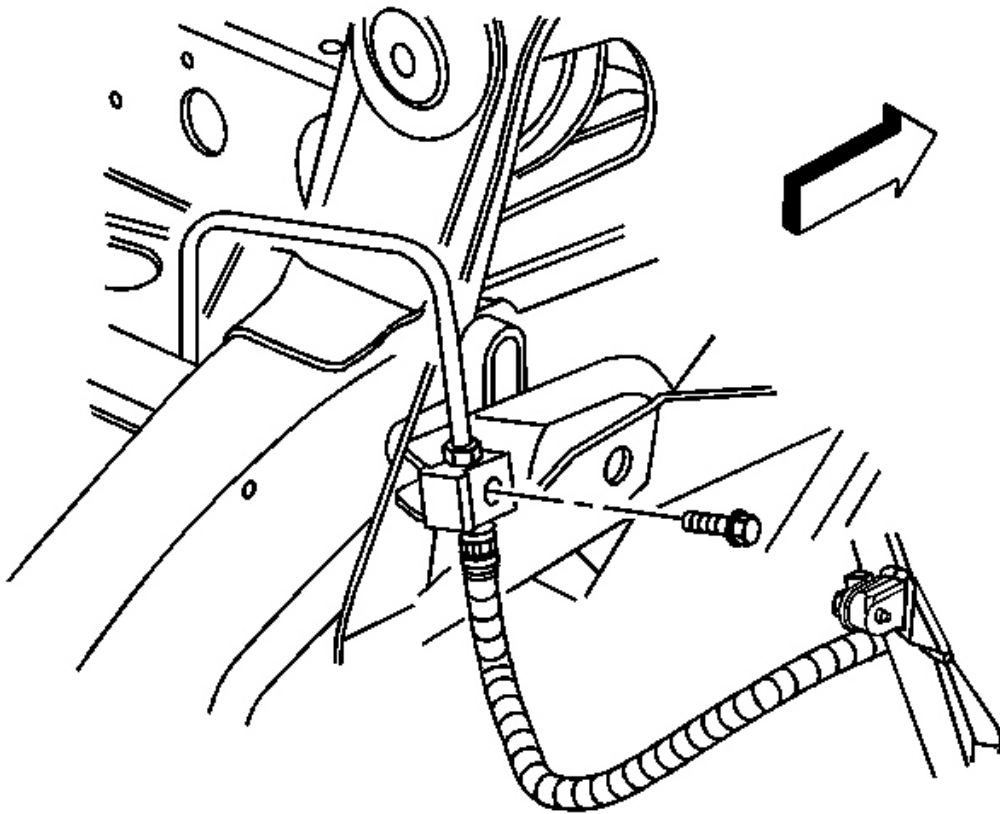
Identifying Front Brake Hose Retaining Bolt
